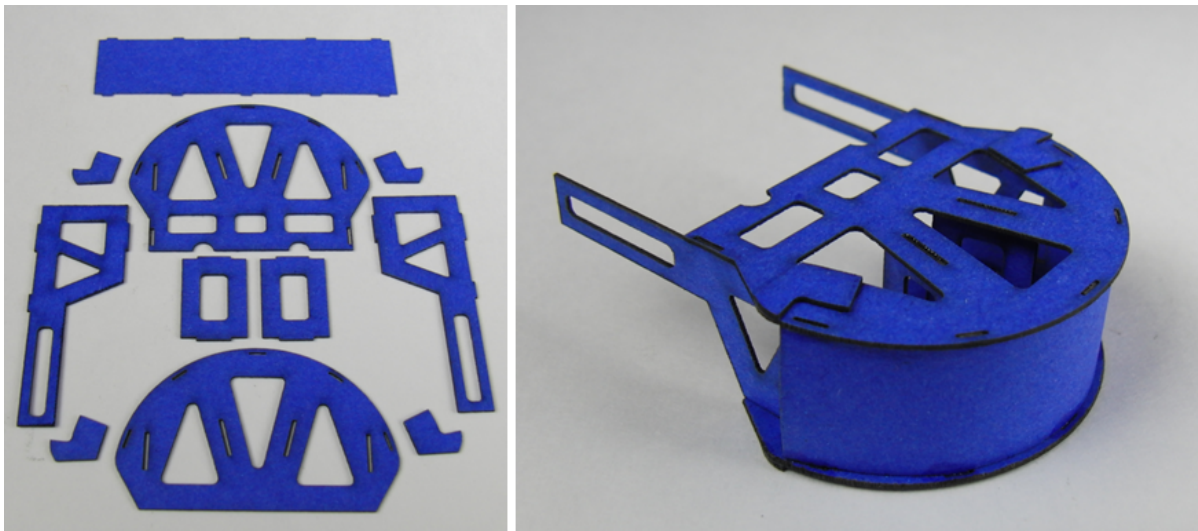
(Left) Laser-cut pieces used to assemble tactile bumper mounting structure. (Right) Completed tactile bumper mounting structure.
